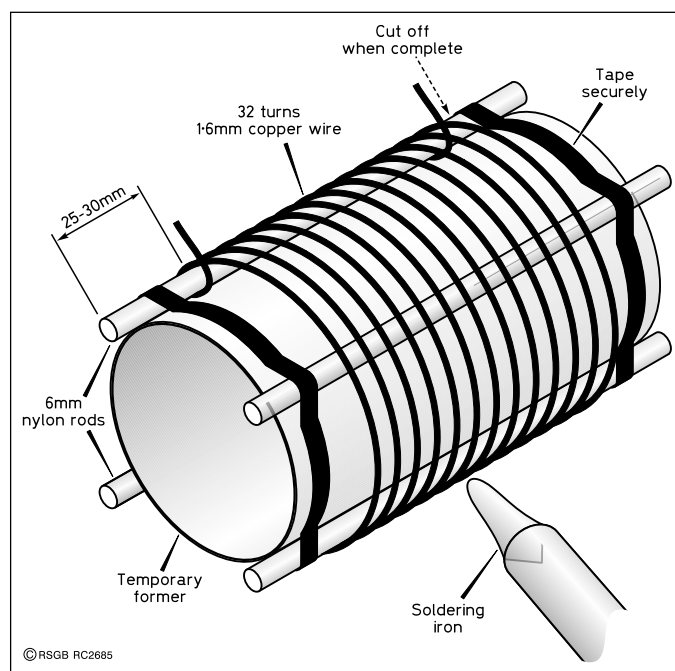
Melting L202 into the nylon rods, using a soldering iron.
